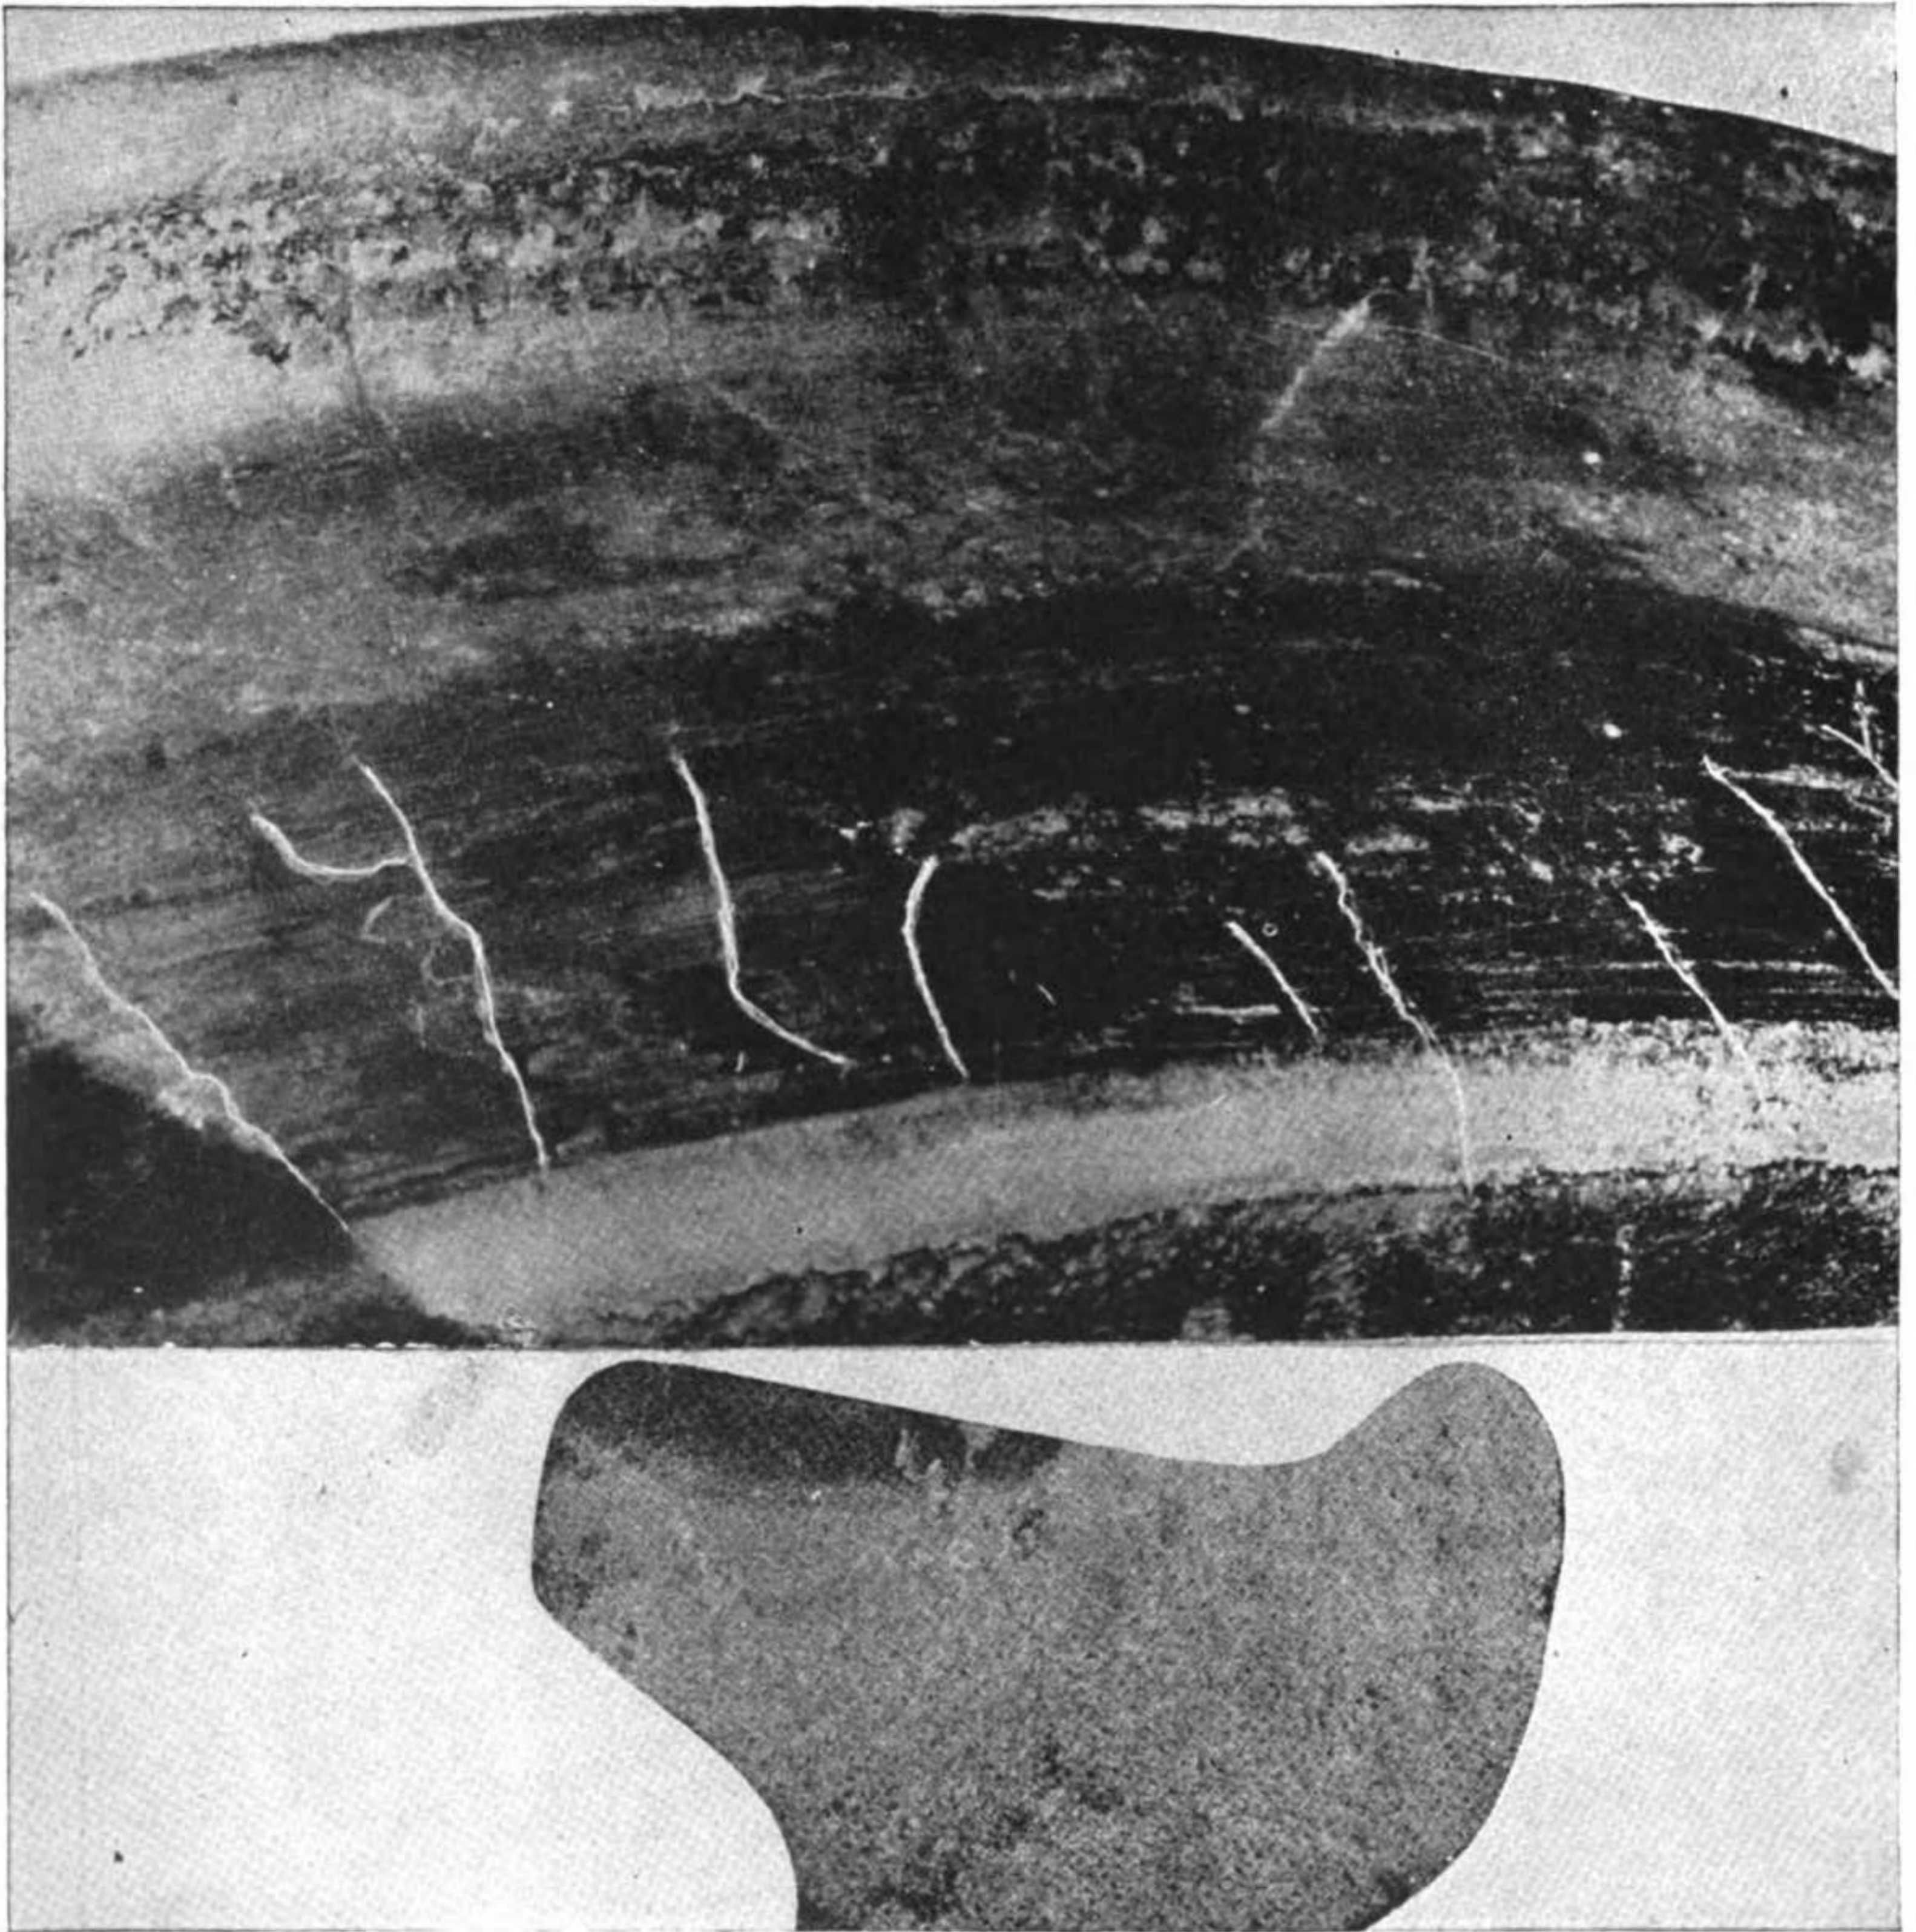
Brake burn cracks, cast-iron wheels. Noncondemnable.
